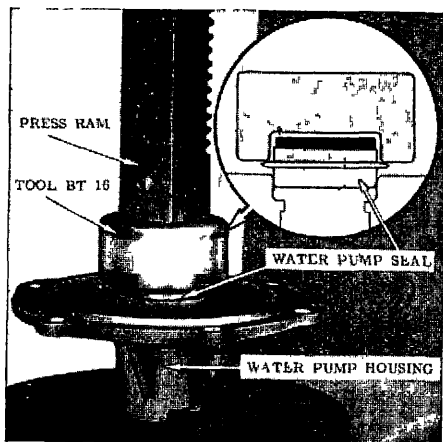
Installing seal in water pump housing on 1949-52 Rocket
